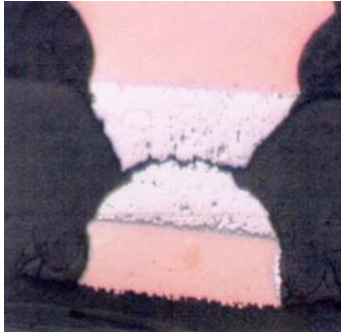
Poor Solder Joint. NiAu PCB finish, Sn Component, Sn3.5Ag0.7Cu Paste.
